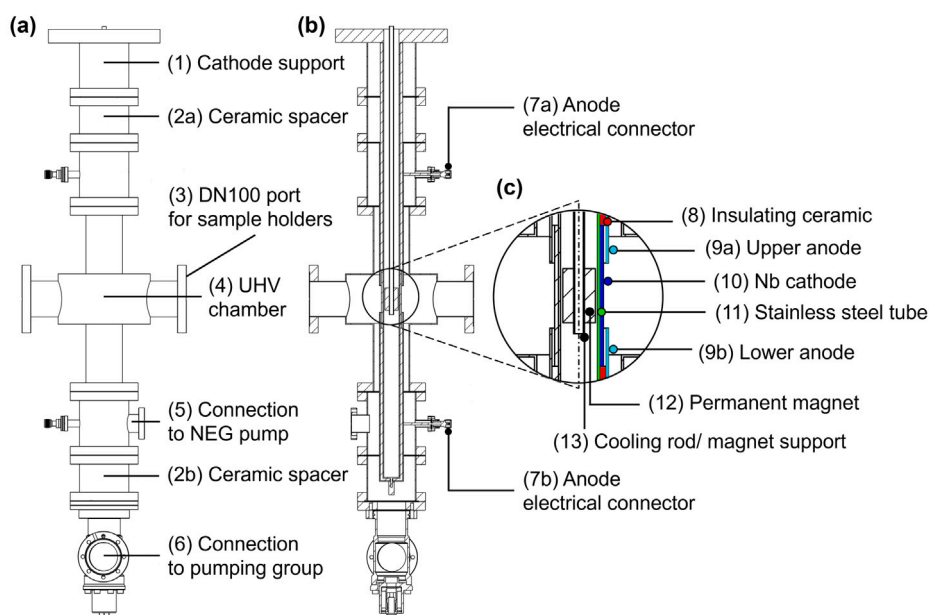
Schematic representation (a) and cross section view (b) of the coating apparatus used to deposit Nb into the trenched Si samples. The inset (c) highlights the cathode assembly.
